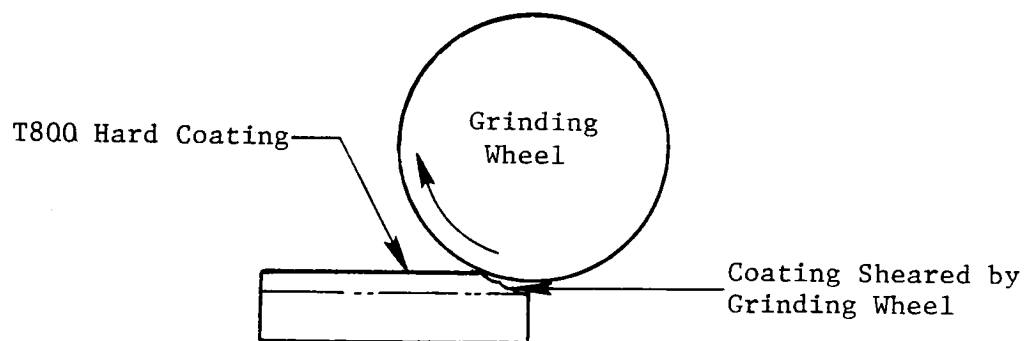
Chipping of Triballoy T800 Hard Coating when Grinding.
